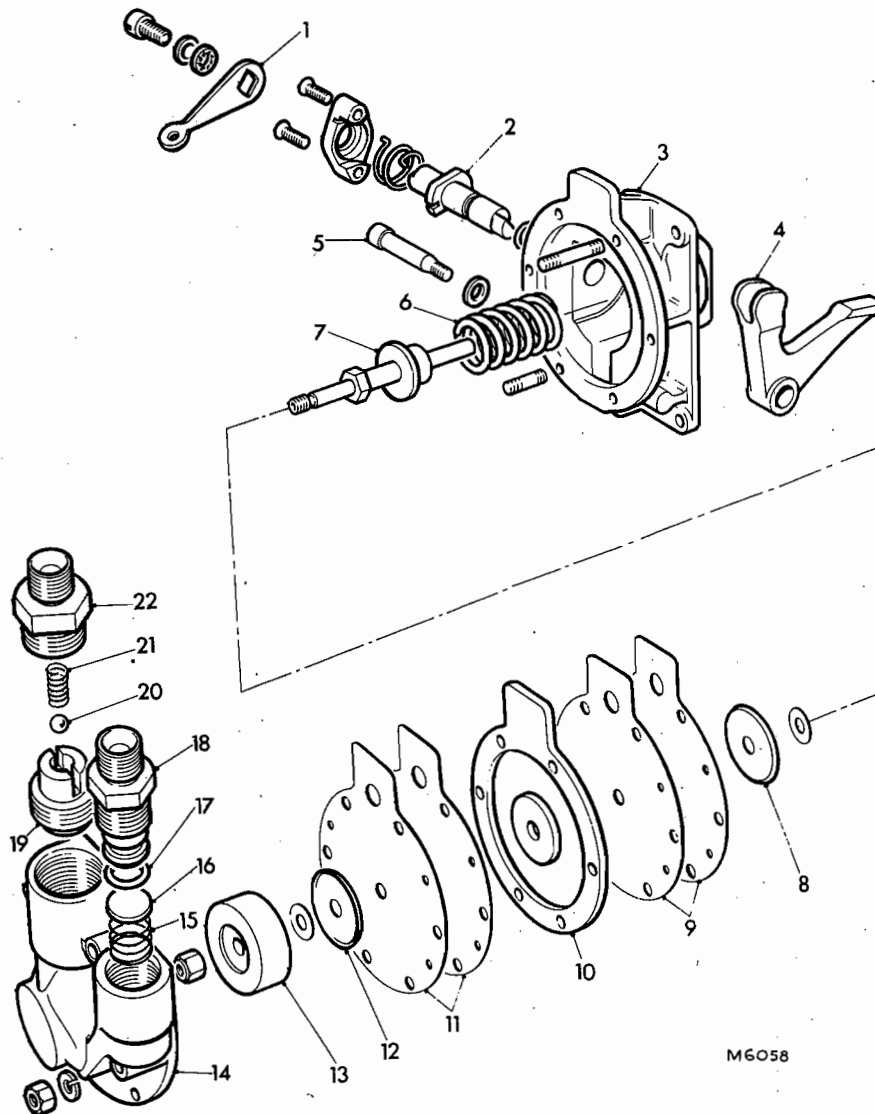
EXPLODED VIEW OF LIFT PUMP
